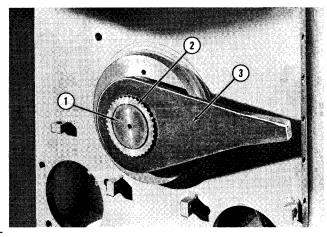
REMOVING LOCKNUT 1. Axle 3. Wrench 2. Locknut
